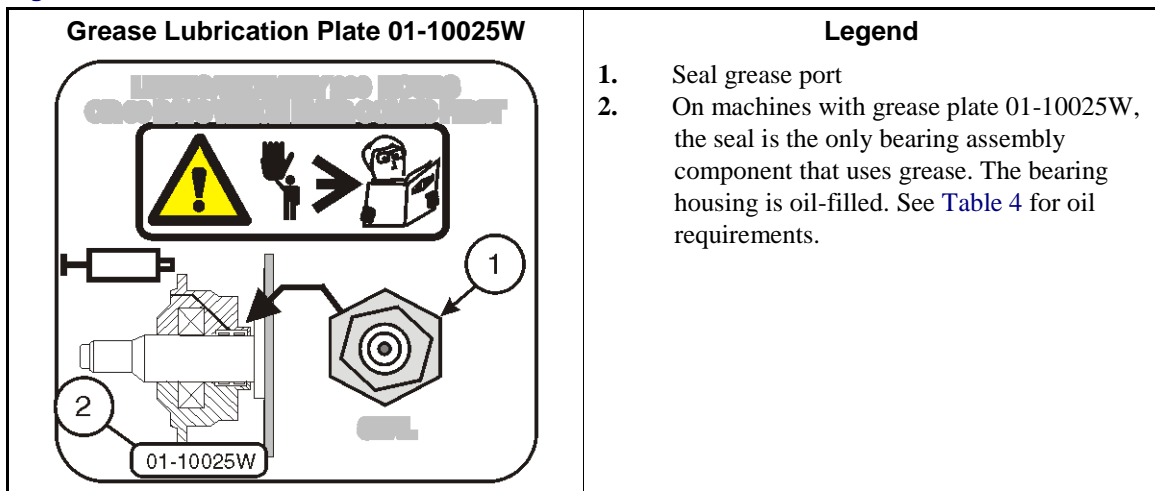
Grease Ports for Oil-filled Bearing Assembly with Seal Grease Maintenance. See also Figure 13.
